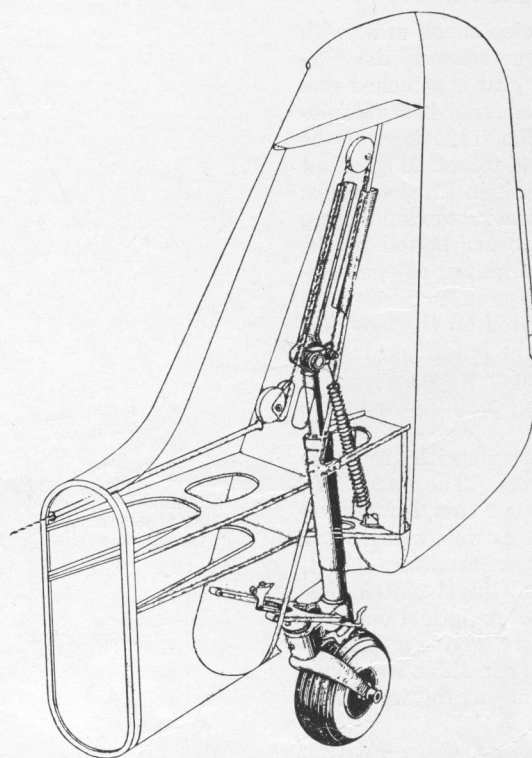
Phantom view of the vertical fin, showing the tail-wheel assembly. A wheel fork is set in the front end of a figure-eight casting to give casting action, but the oleo strut is in direct line with the wheel hub. Loads of both the front end of the drag yoke and the top of the oleo strut are taken by the diagonal member. A stabilizer goes between horizontal ribs extending aft from the front bulkhead to the diagonal member.
